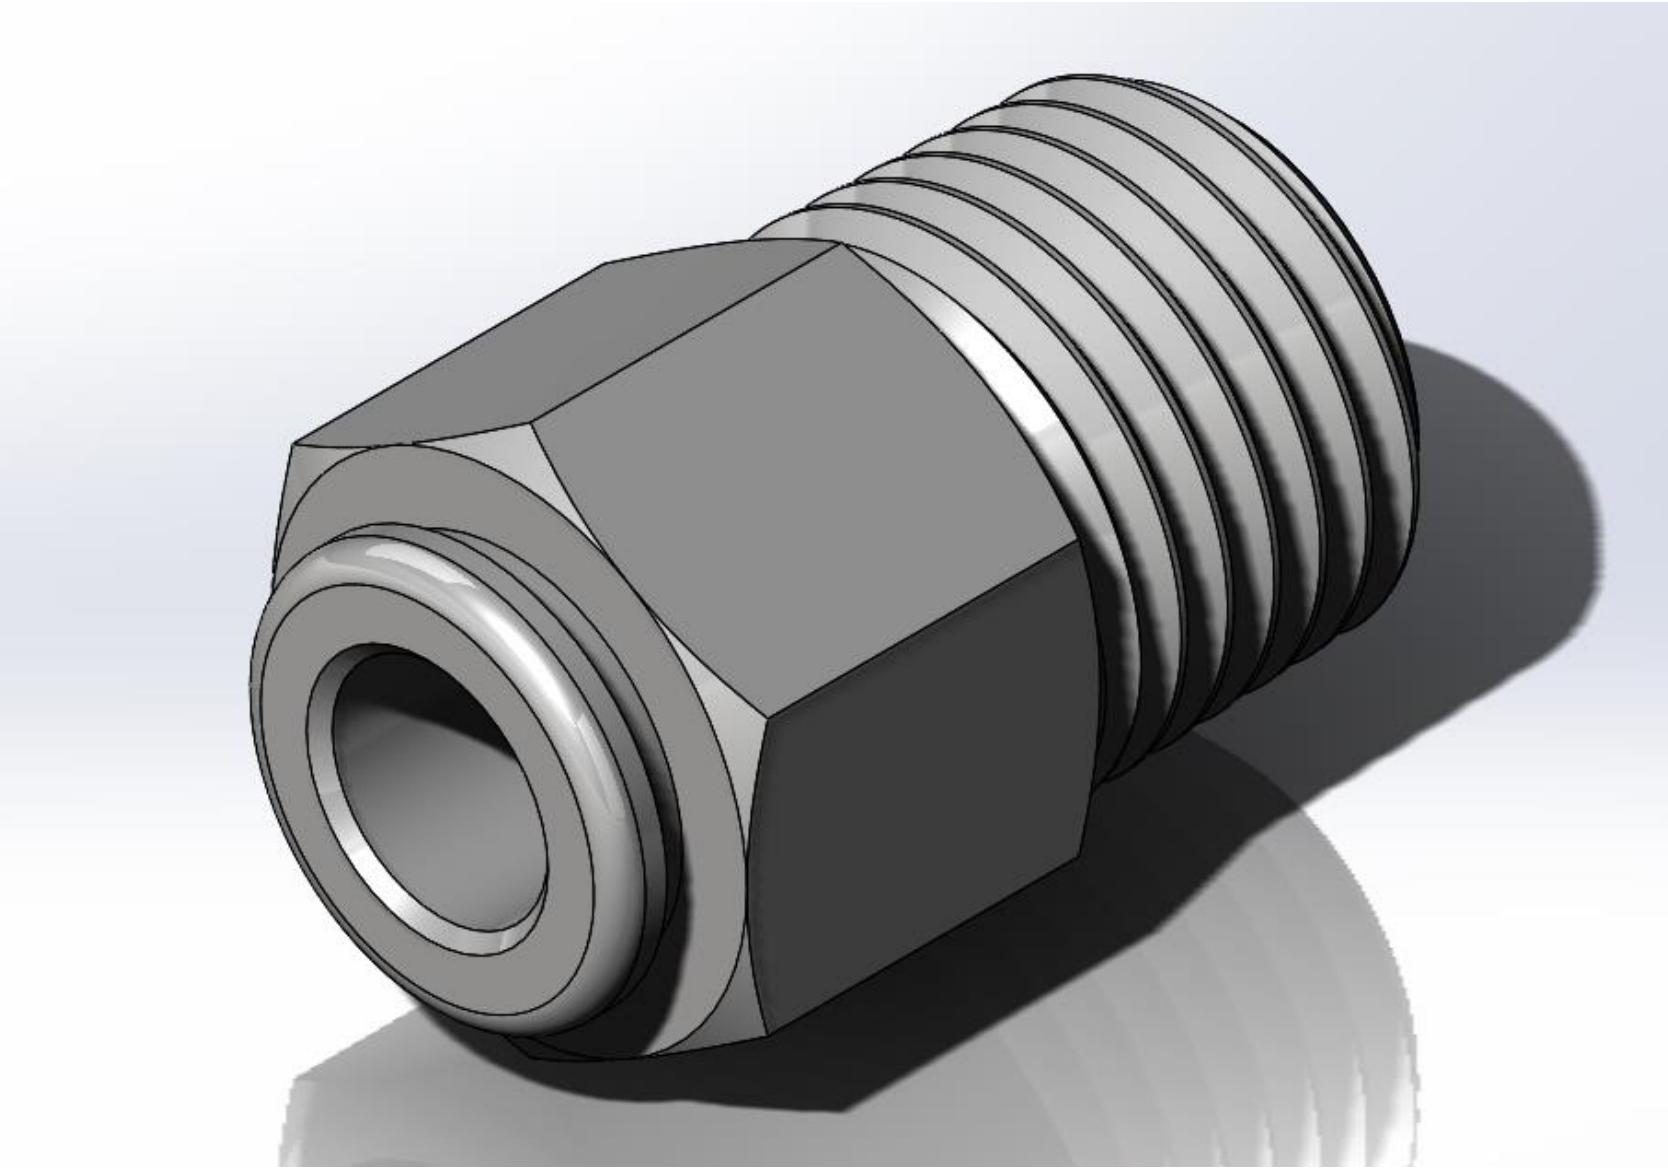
Part 1025 (Push-to-Connect Tube Fitting for Air, Adapter, for $\frac{1}{4}$ " Tube OD, $\frac{1}{4}$ NPT Male) CAD Drawing
